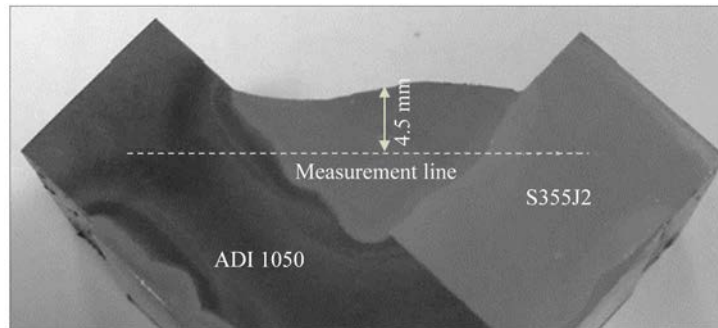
HV1 measurement line on cross-section of a joint type C (cruciform non-load-carrying fillet-welded joint)
